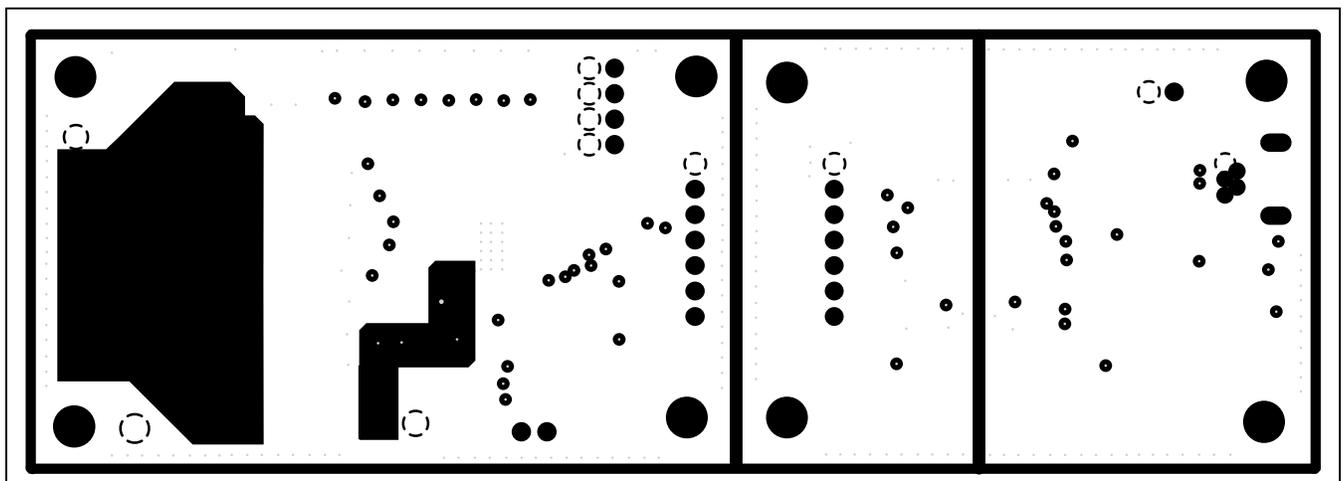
MAX31912/MAX31913 EV Kit PCB Layout—Internal Layer 1
